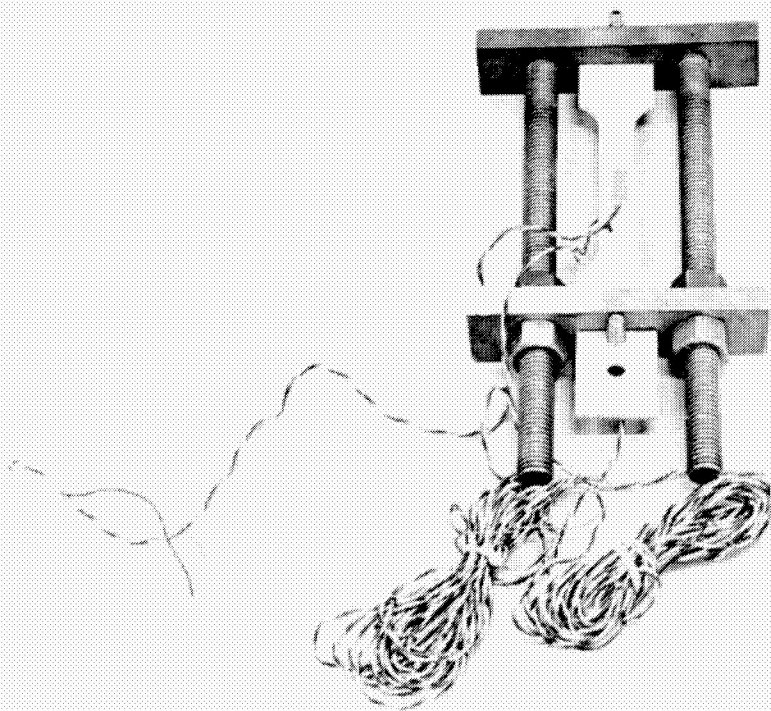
X-RAY CALIBRATION FIXTURE WITH 7075-T6 ALUMINUM ALLOY
